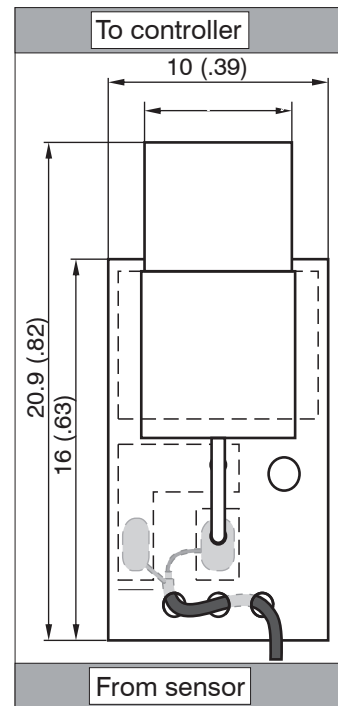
Transition board dimensions, dimensions in mm (inches)
